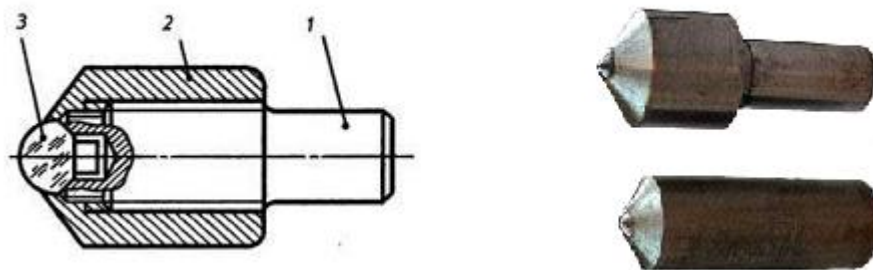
a) A tip for diamond burnishing: 1 - tip, 2 - tool holder, 3 - diamond crystal; b) Appearance of the handpieces.
